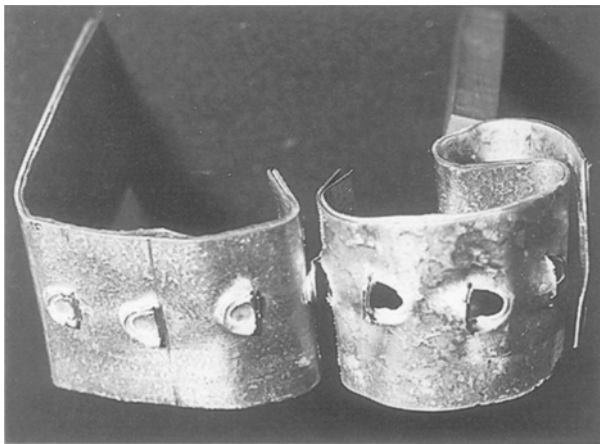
Aspect of the peel test specimen showing acceptable behaviour.
